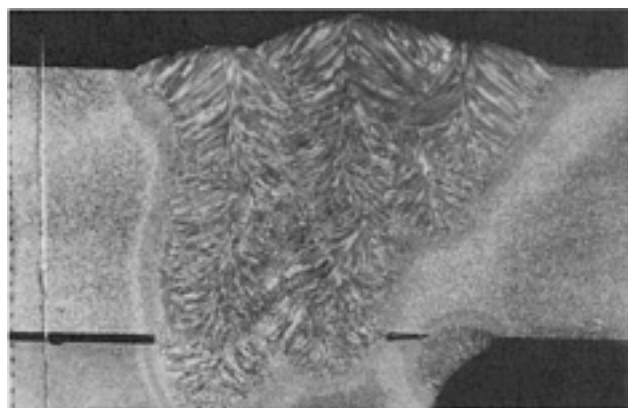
Same as [Fig. 5](#). Weld wire: 2.4 mm ($\frac{3}{32}$ in.). Mil Spec 100S-1, OP121TT flux. Heat input: 1.0 MJ/m. Macrostructure shows the fusion zone, heat-affected zone, reheat zones, and base metal in a multiple-pass butt weld. 85 mL H₂O + 15 mL HNO₃ + 5 mL methanol. 2×
